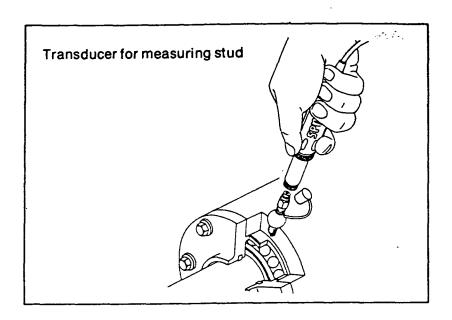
Typical S.P.M. mechanical stud fitted to a bearing.
